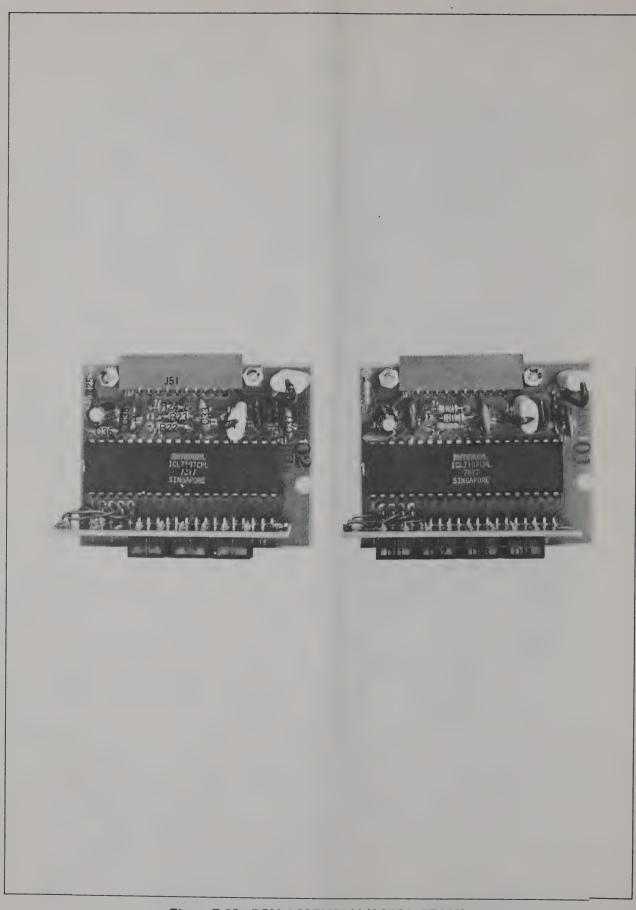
DPM ASSEMBLY (SG231, SZ441)
